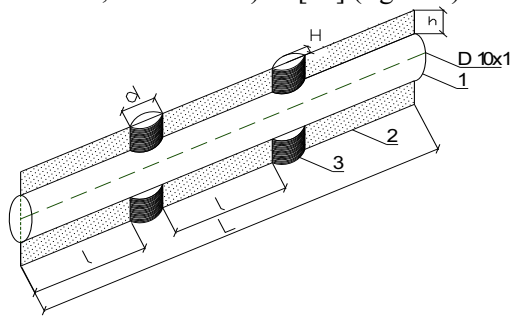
Element of a heat-exchanging surface of the shell and tube heat exchanger: 1 – a tube, 2 – a plate, 3 – edges of a cylindrical form.
